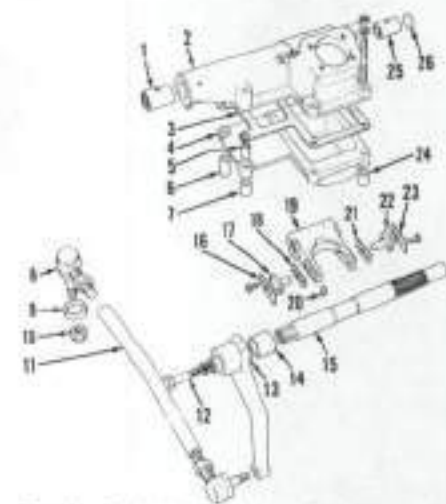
Exploded view of steering box and its related parts used on 1190 models with manual steering.
